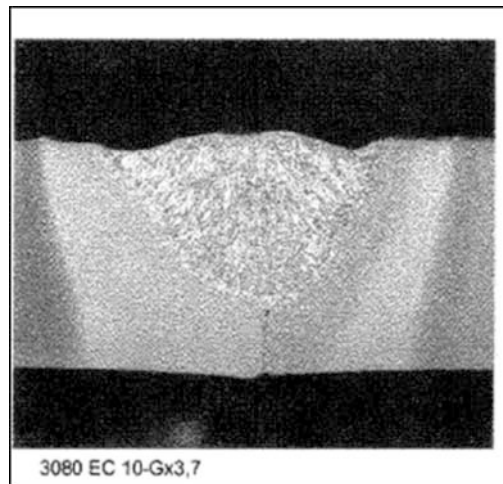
Weld seam with arc-welding with external magnetic fields
